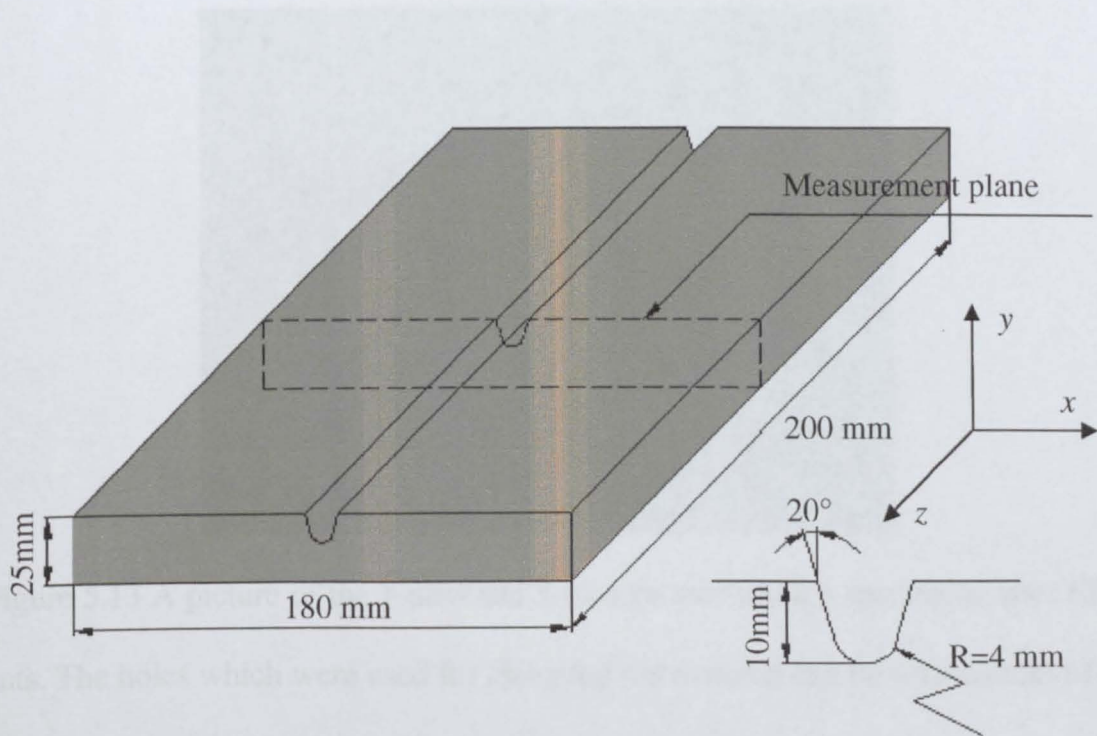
Schematic of the groove weld blank before welding and the geometry of the groove.
